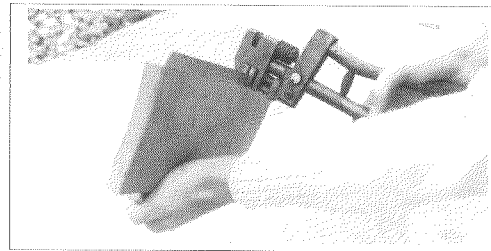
Joddler in action. Double action is best as it can also be used for punching 3/16 inch holes. very useful for preparing joints for plug welding applications.
